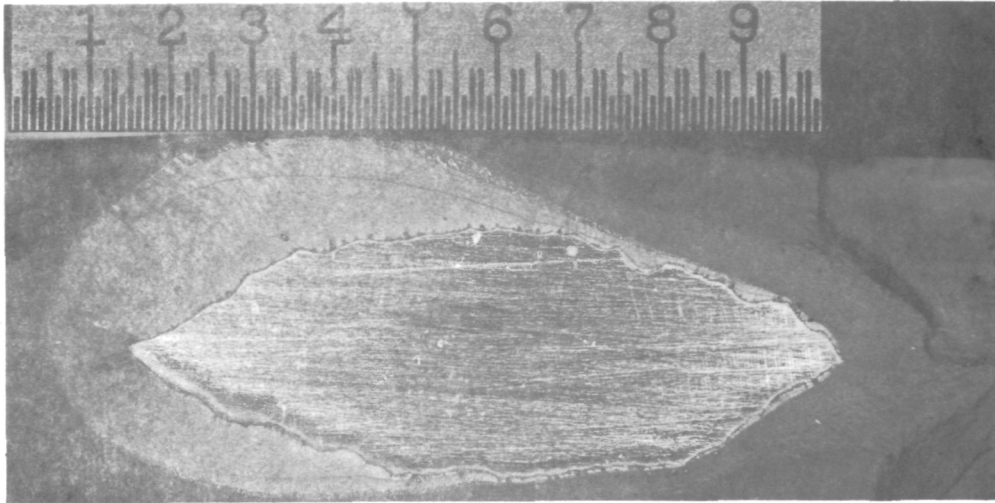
Flaw map and fractograph of specimen F-25 after breakthrough.
